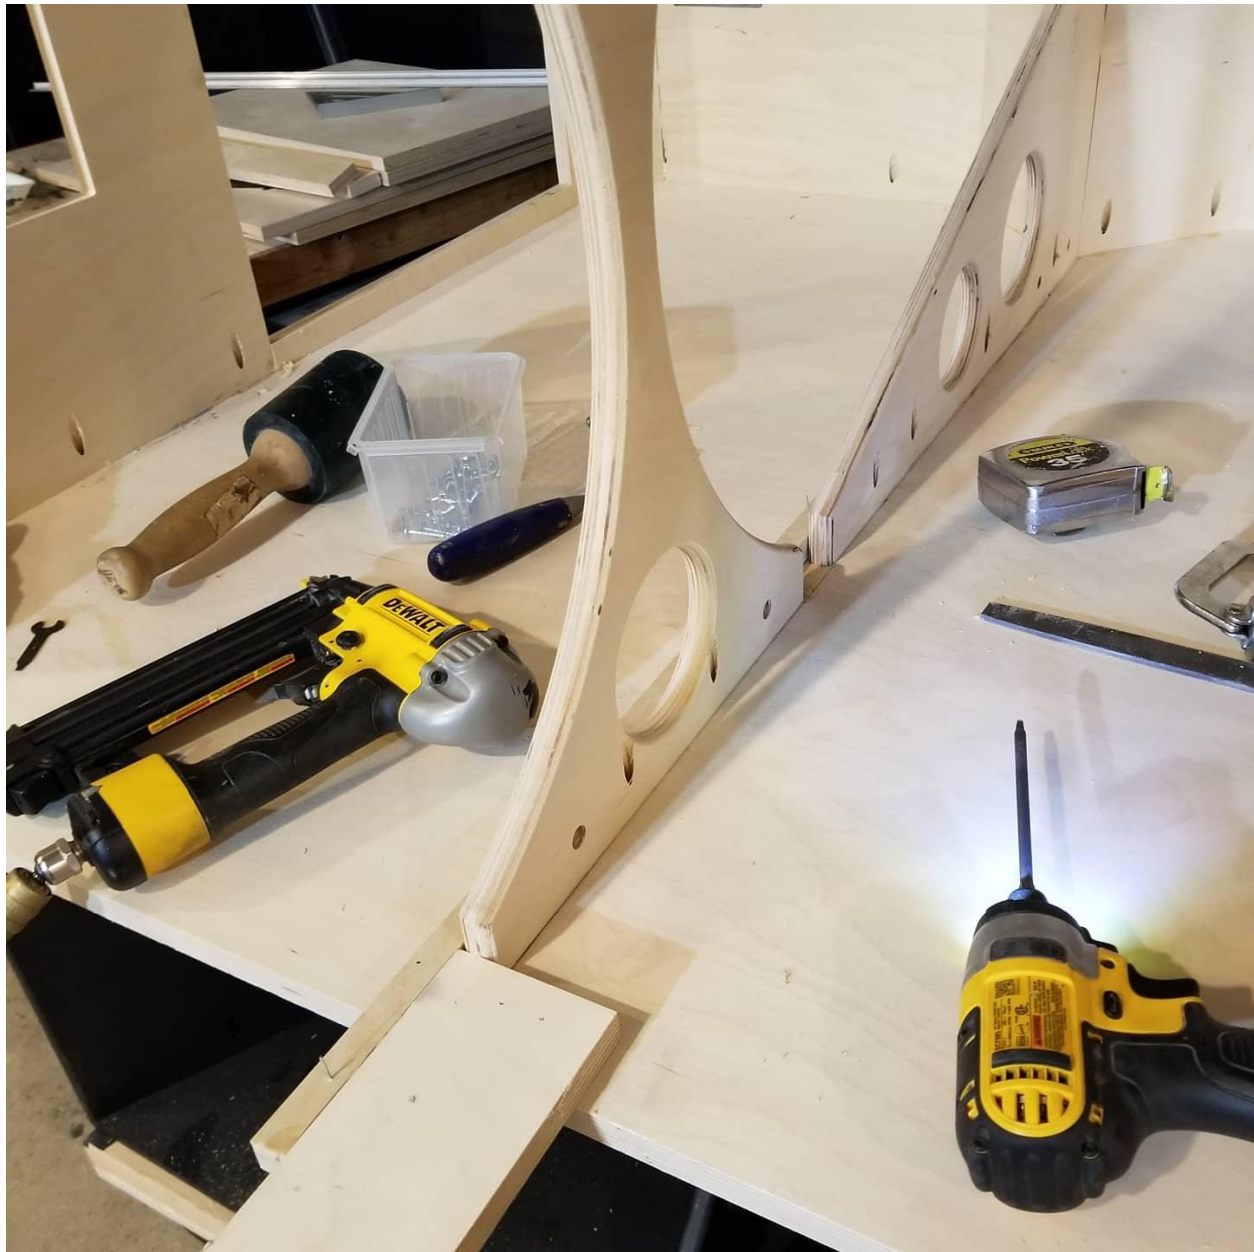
More Stabilizing Pieces, and did you see all these pocket screws?
